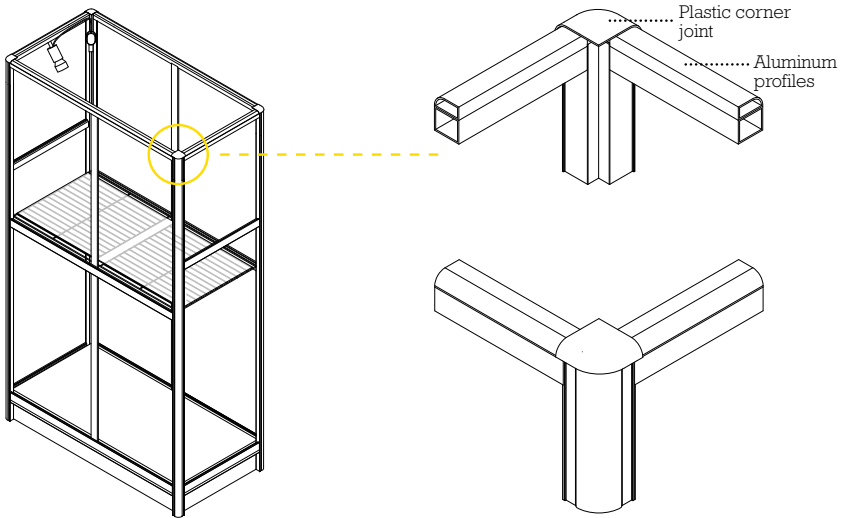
Construction detail - Corner joints of the display | Axonometric views.
